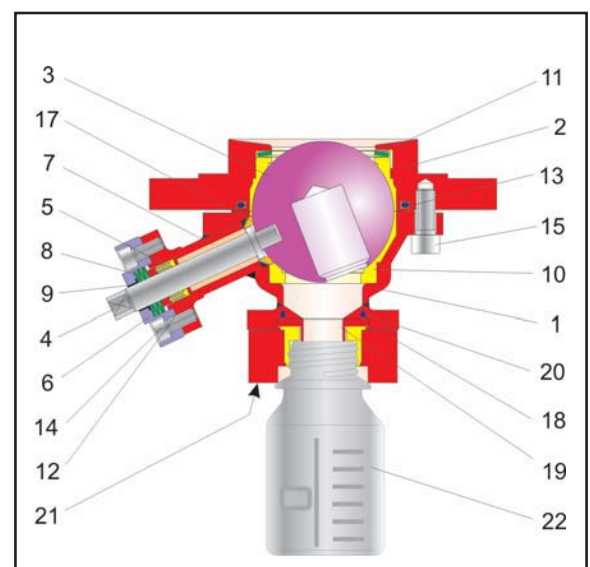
Sectional view of sampling valve Series 27h => Parts list see table 1
